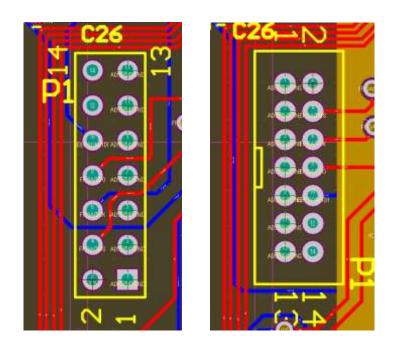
Close-Up CAD Drawings of the Footprint of the FPGA's JTAG Configuration Header and Surrounding Traces Before (Left) and After (Right) the Incorrect 100 mil Header was Replaced Figure 39: Photograph Showing How the Flying Lead Adapter is Used to Connect the Xilinx Platform II USB FPGA Configuration Cable to the 100 mil Header on the Control Board
